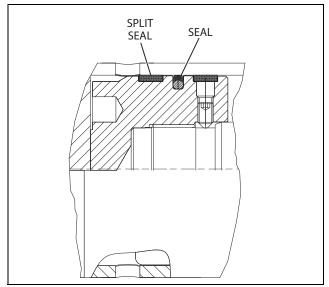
Piston Seal Kit Installation (S/N 0300142664 to S/N 0300183033)
